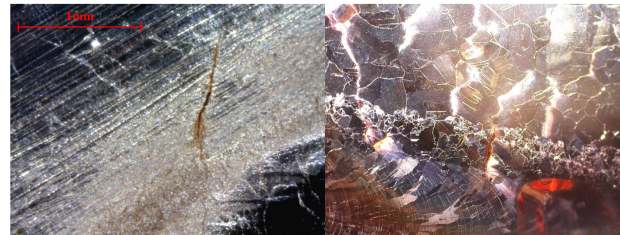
Defects on the welding area of the QS series cavities.
